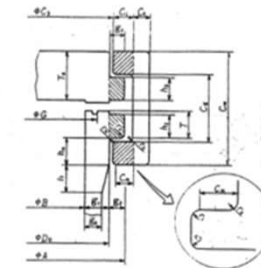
DIMENSION OF INTEGRAL CLAMP TYPE
